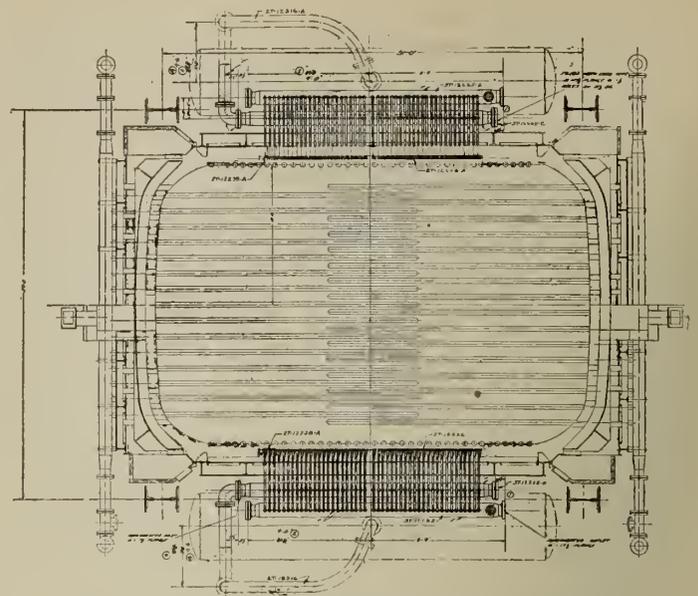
Horizontal Section through Revamped Furnace of Fordson Plant.
